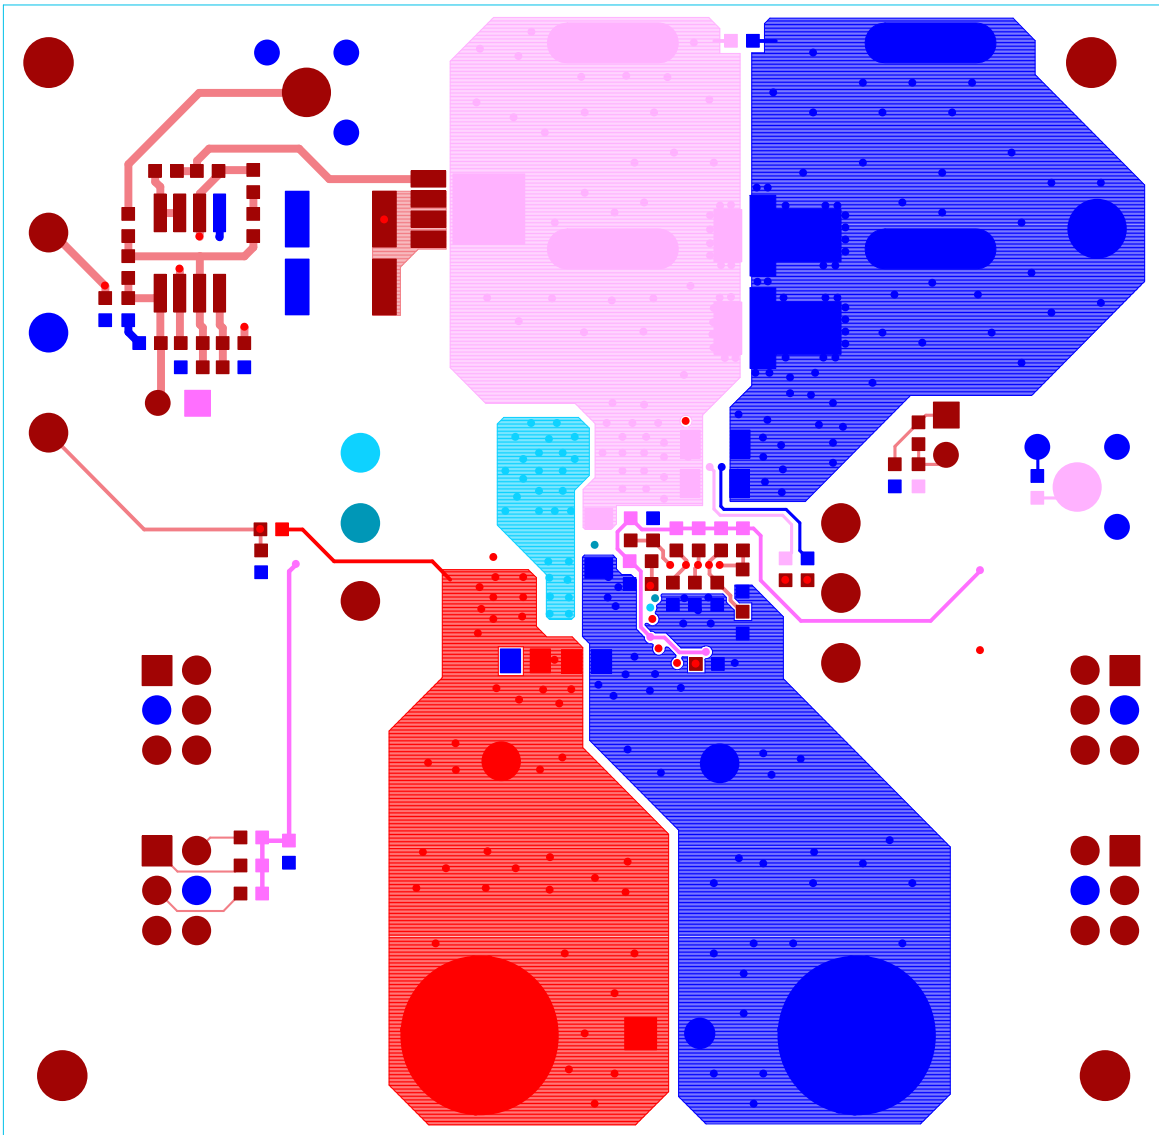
PCB - BOTTOM ASSEMBLY (TOP VIEW)
